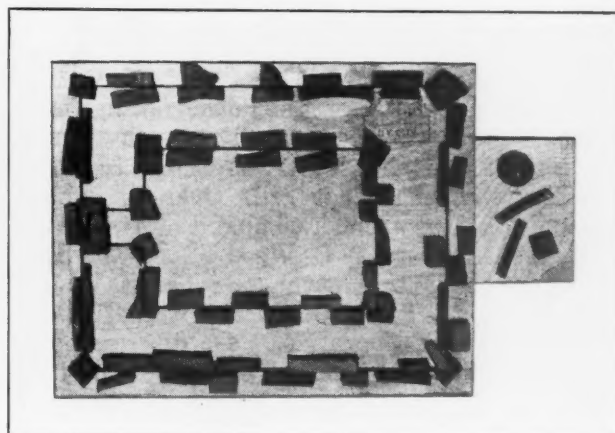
Die with Pieces of Sponge Rubber Along Cutting Edge for Stripping
